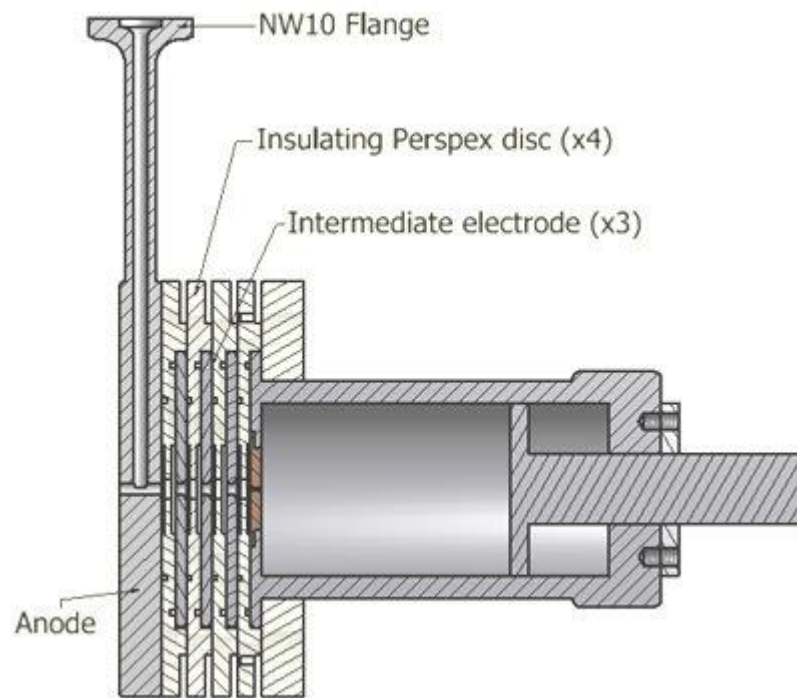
A four-gap pseudospark discharge chamber assembly.
